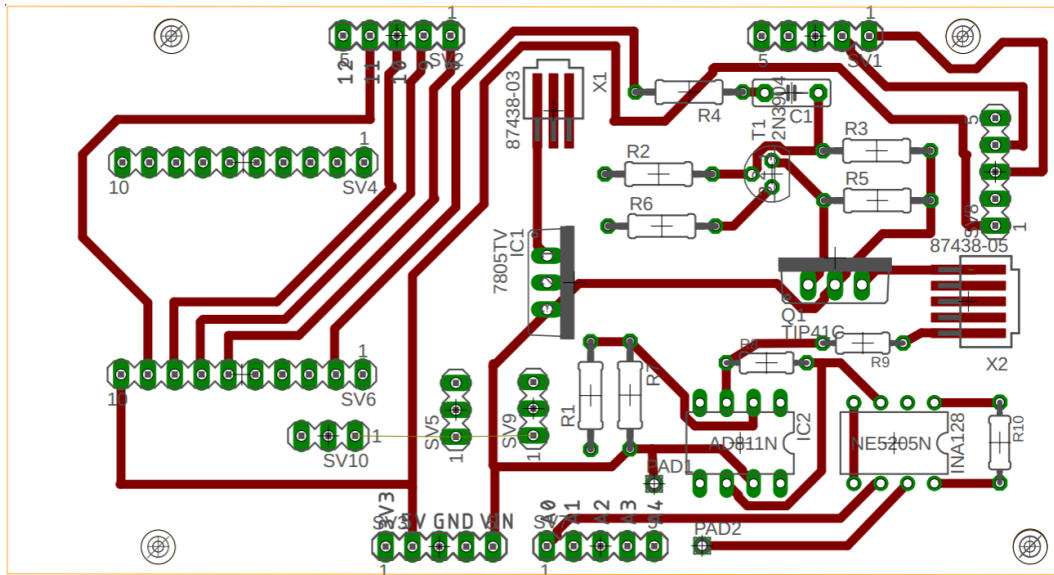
PCB design incorporated in the PRD which houses all the electrical components.
